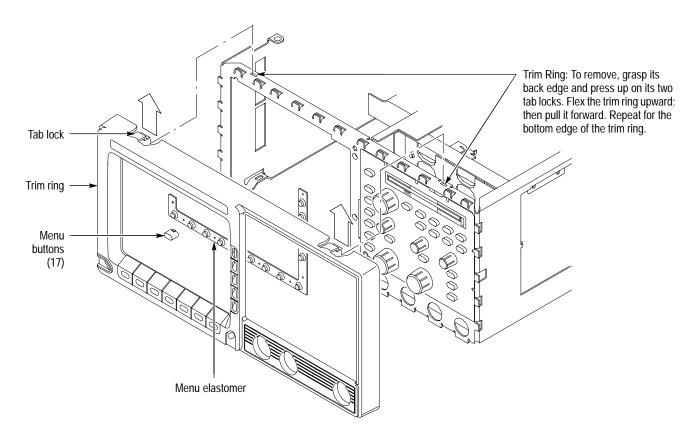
Trim ring, menu elastomer, and menu buttons removal
